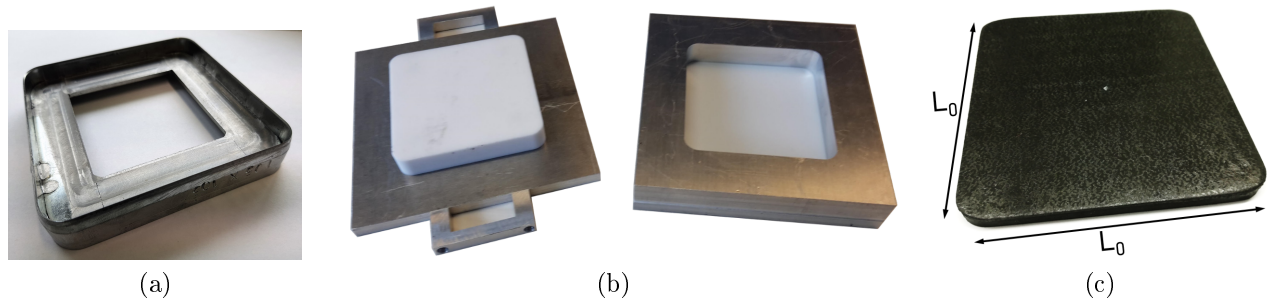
(a) Final cut using a stainless steel die cutting. (b) Final compaction step using a compaction mold [38]. (c) Final shape of UD IMA/M21 prepreg sample.
